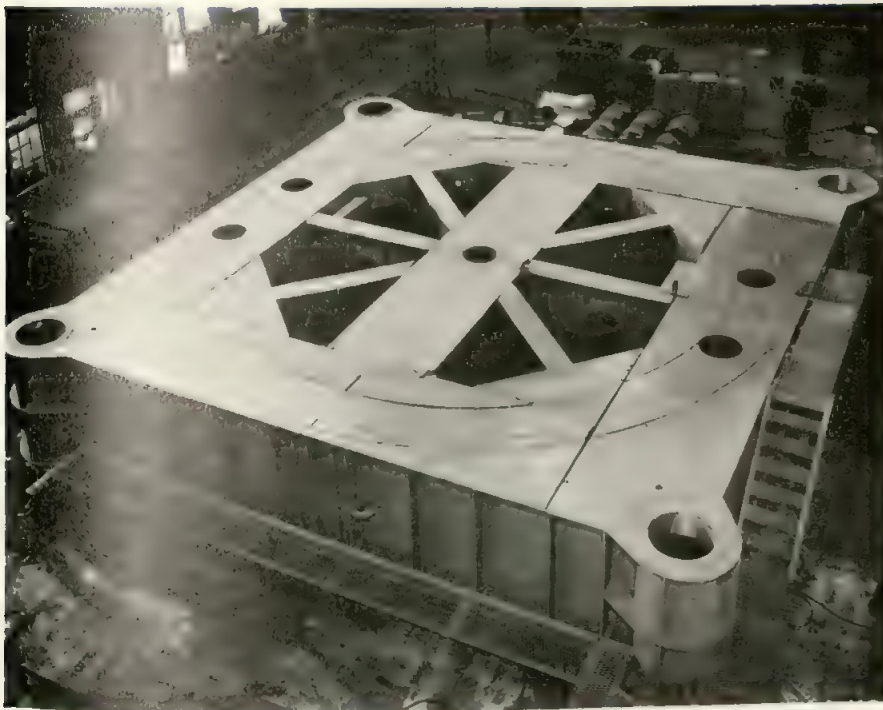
Welded lower frame for large stripping shovel.
